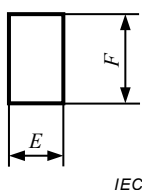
Fixture cut-out information for LC simplex adaptor
